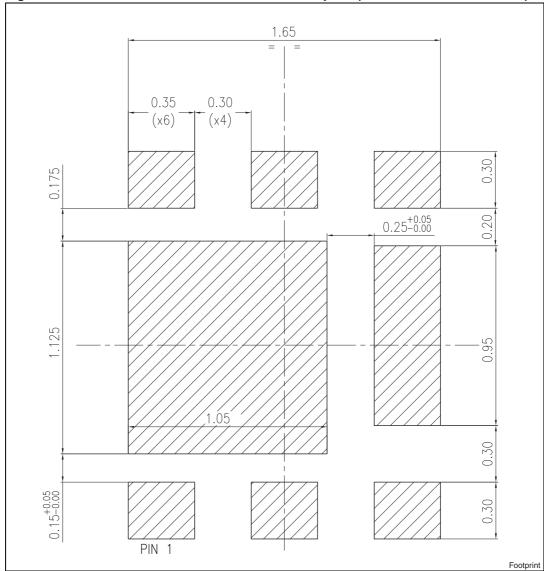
PowerFLAT™ 2 x 2 recommended footprint (dimensions in millimeters)
